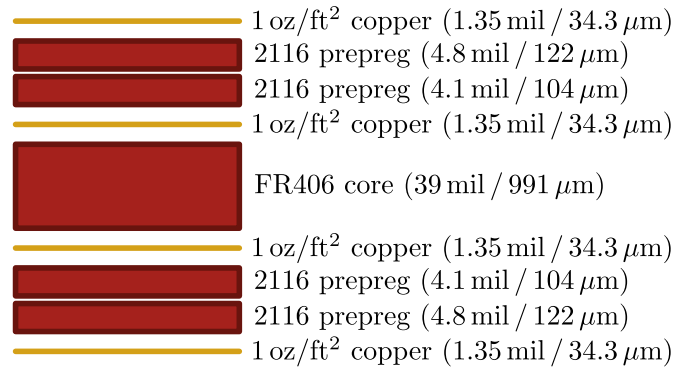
The stackup of the manufactured PCB with the thickness of each layer indicated. The thickness of the final board is 62.2 mil (1.58 mm) with a $\pm 10\%$ manufacturing tolerance.
